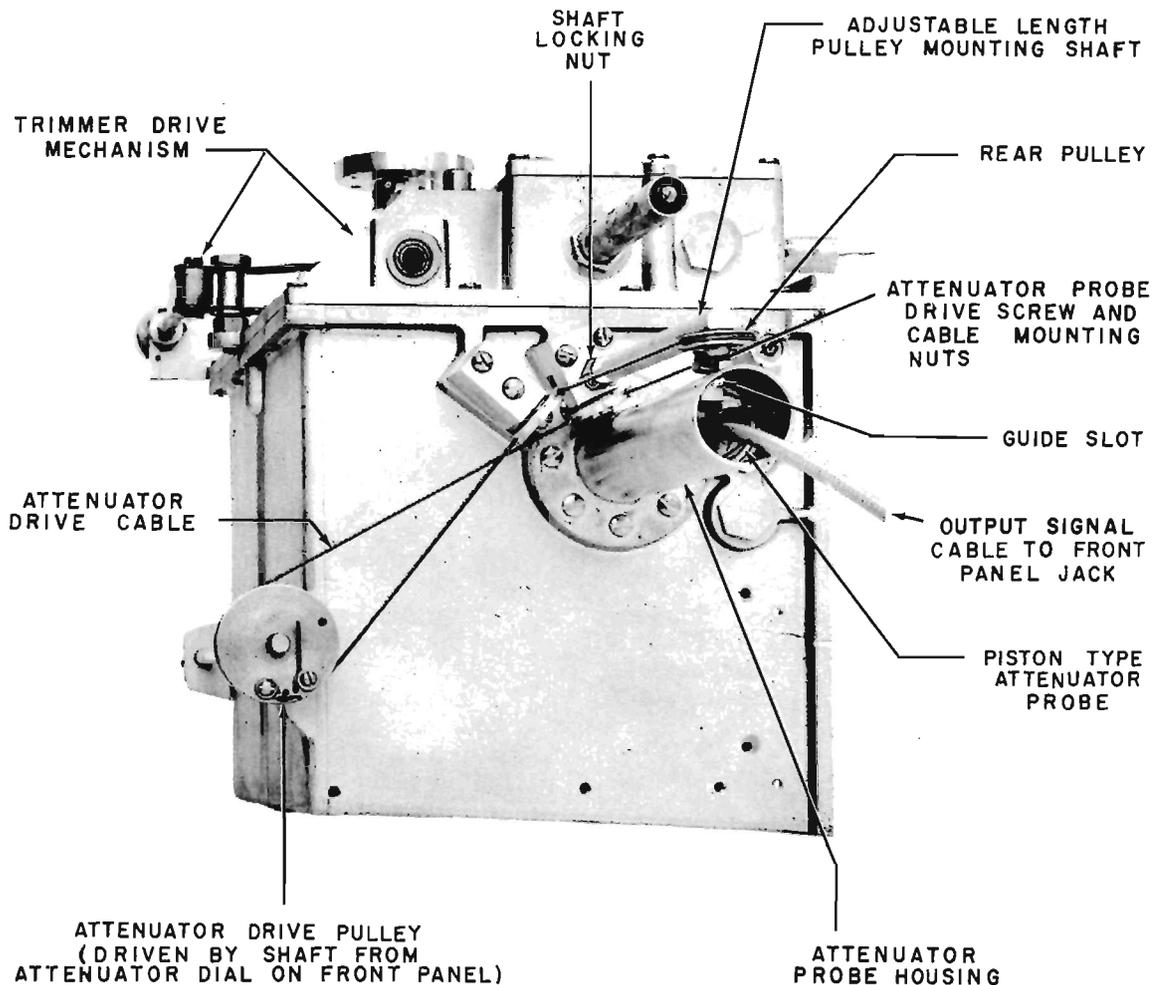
R-F Generator Assembly Rear View, showing Output Attenuator Drive System
